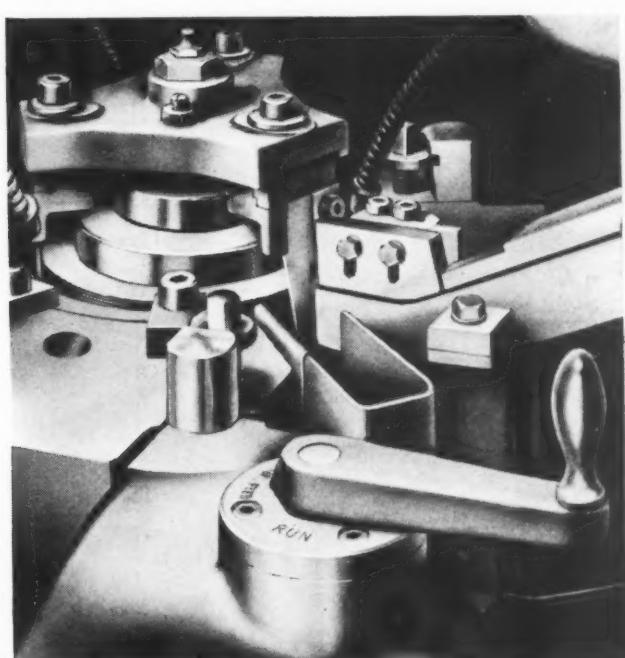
Close-up view of thread-rolling head which is equipped with automatic hopper feeds
